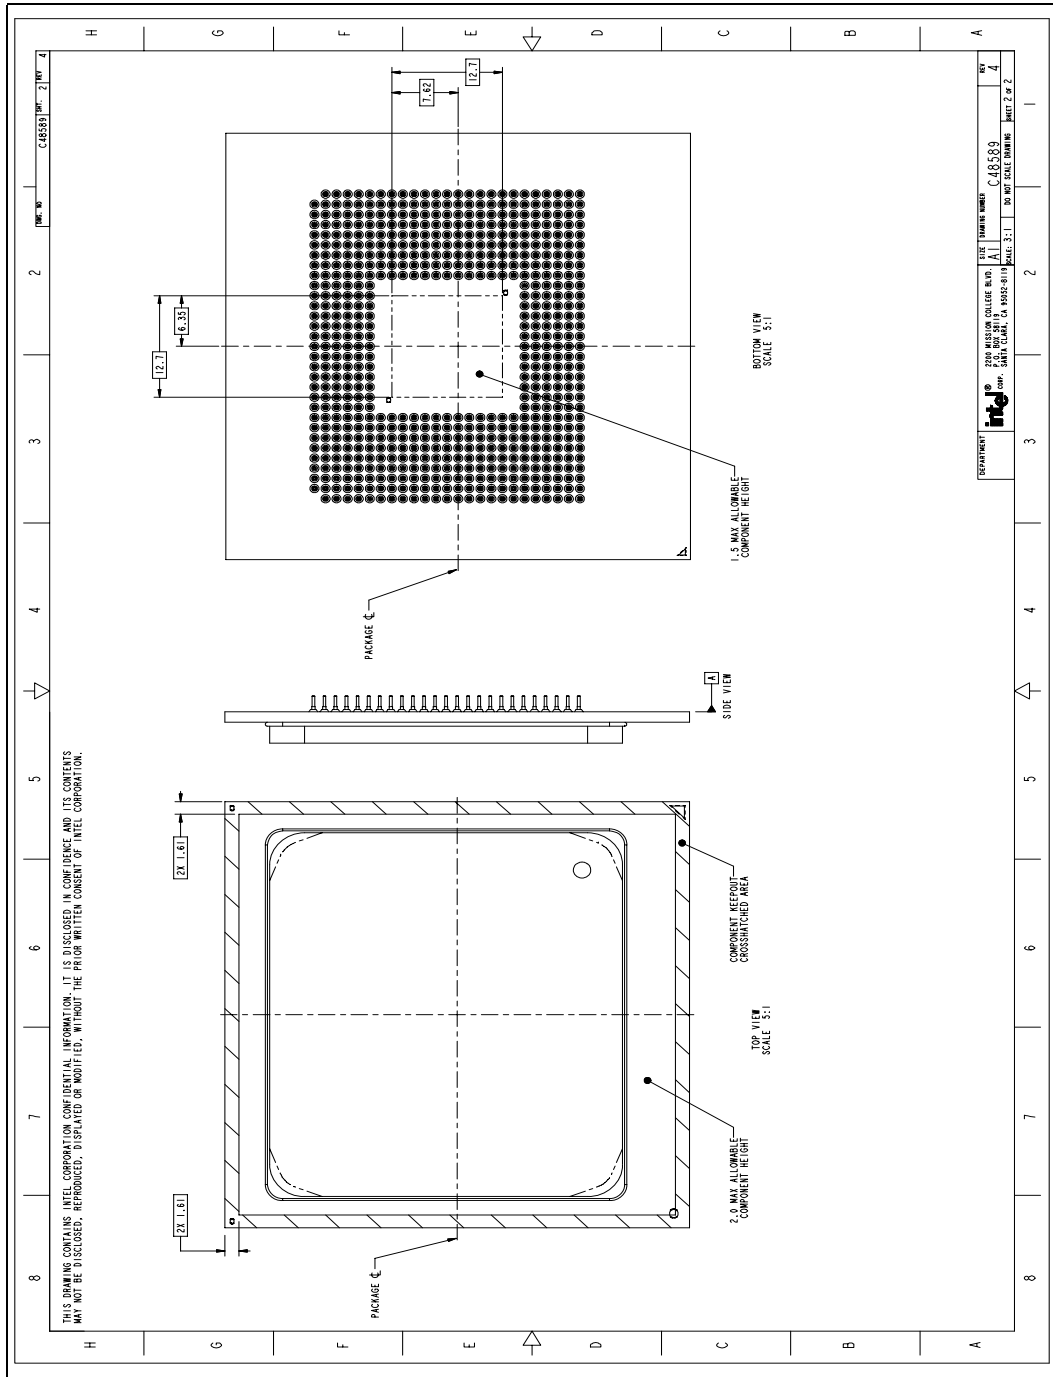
Processor Package Drawing (Sheet 2 of 2)
